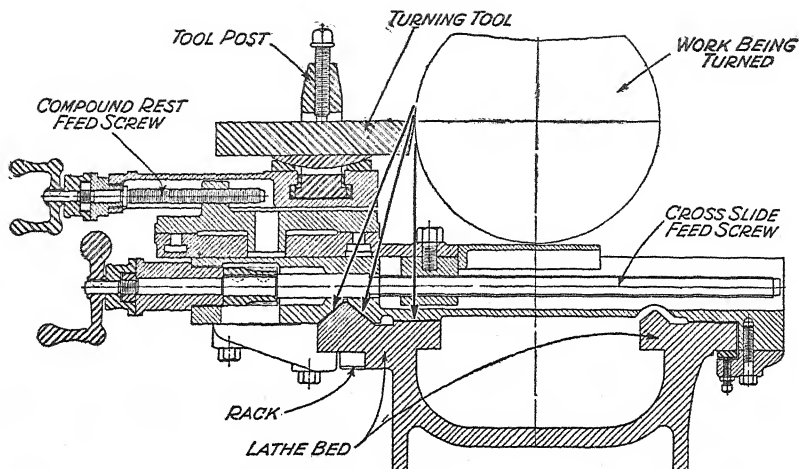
A Sectional View of the Sidney Lathe Bed, Carriage, and Compound Rest.
